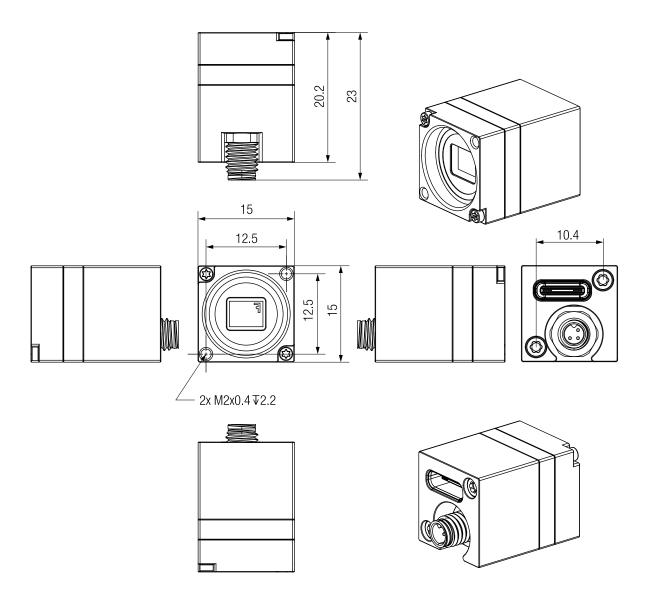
Dimensional drawing of MU050xR-SY with ADPT-MU-CX3-TC-V adapter
